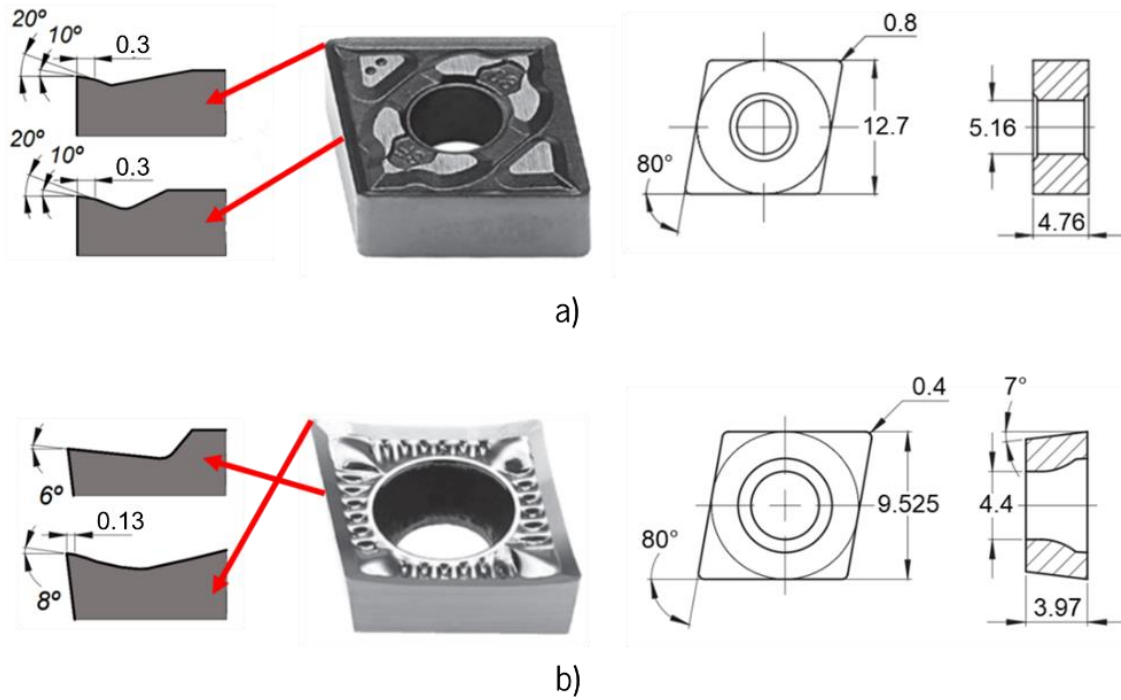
Shape and dimensions of the inserts used for the machining tests: a) CNMG 120408-SF and b) CCGT 09T304 (all the dimensions in mm)
